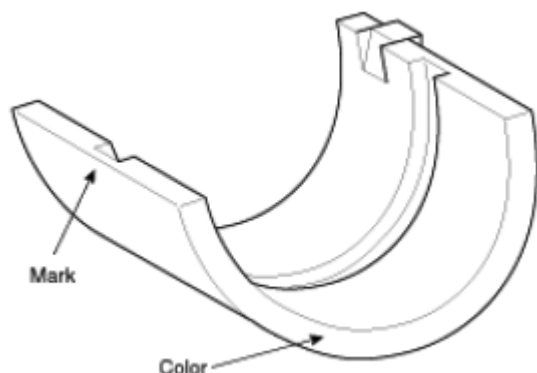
Identifying Identification Mark (Crankshaft Bearing)
